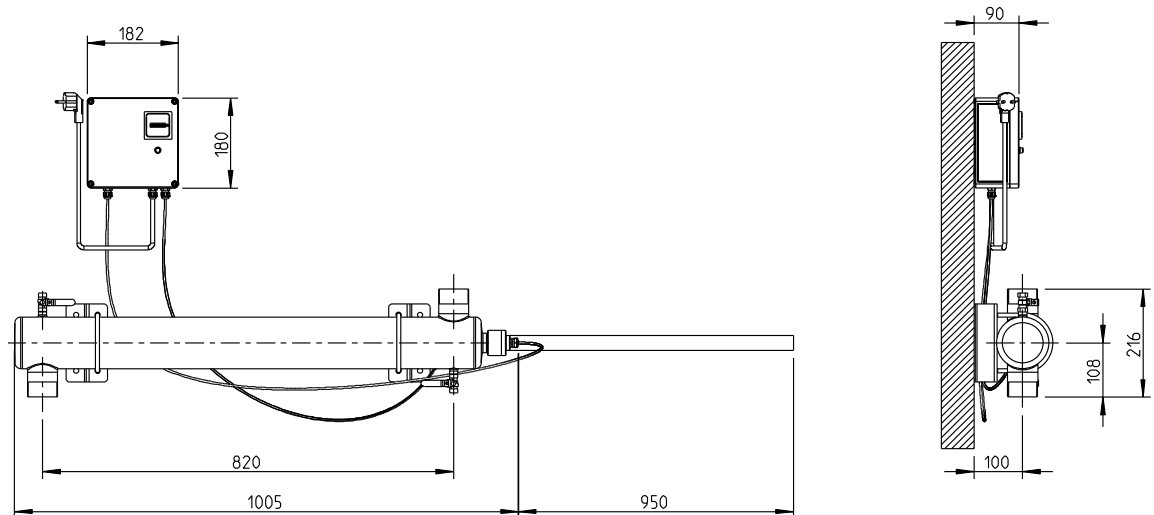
Dimensional drawing of GENO-UV-75 with optional wall bracket
